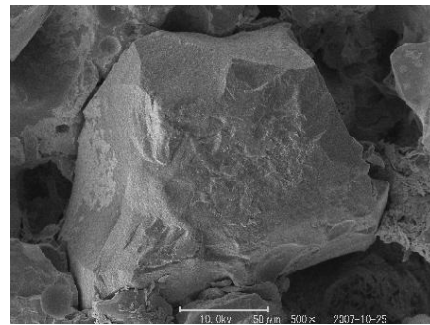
Typical example of worn cBN-U grain cutting edge in grinding process ($V'_w=20000\text{mm}^3/\text{mm}$)
